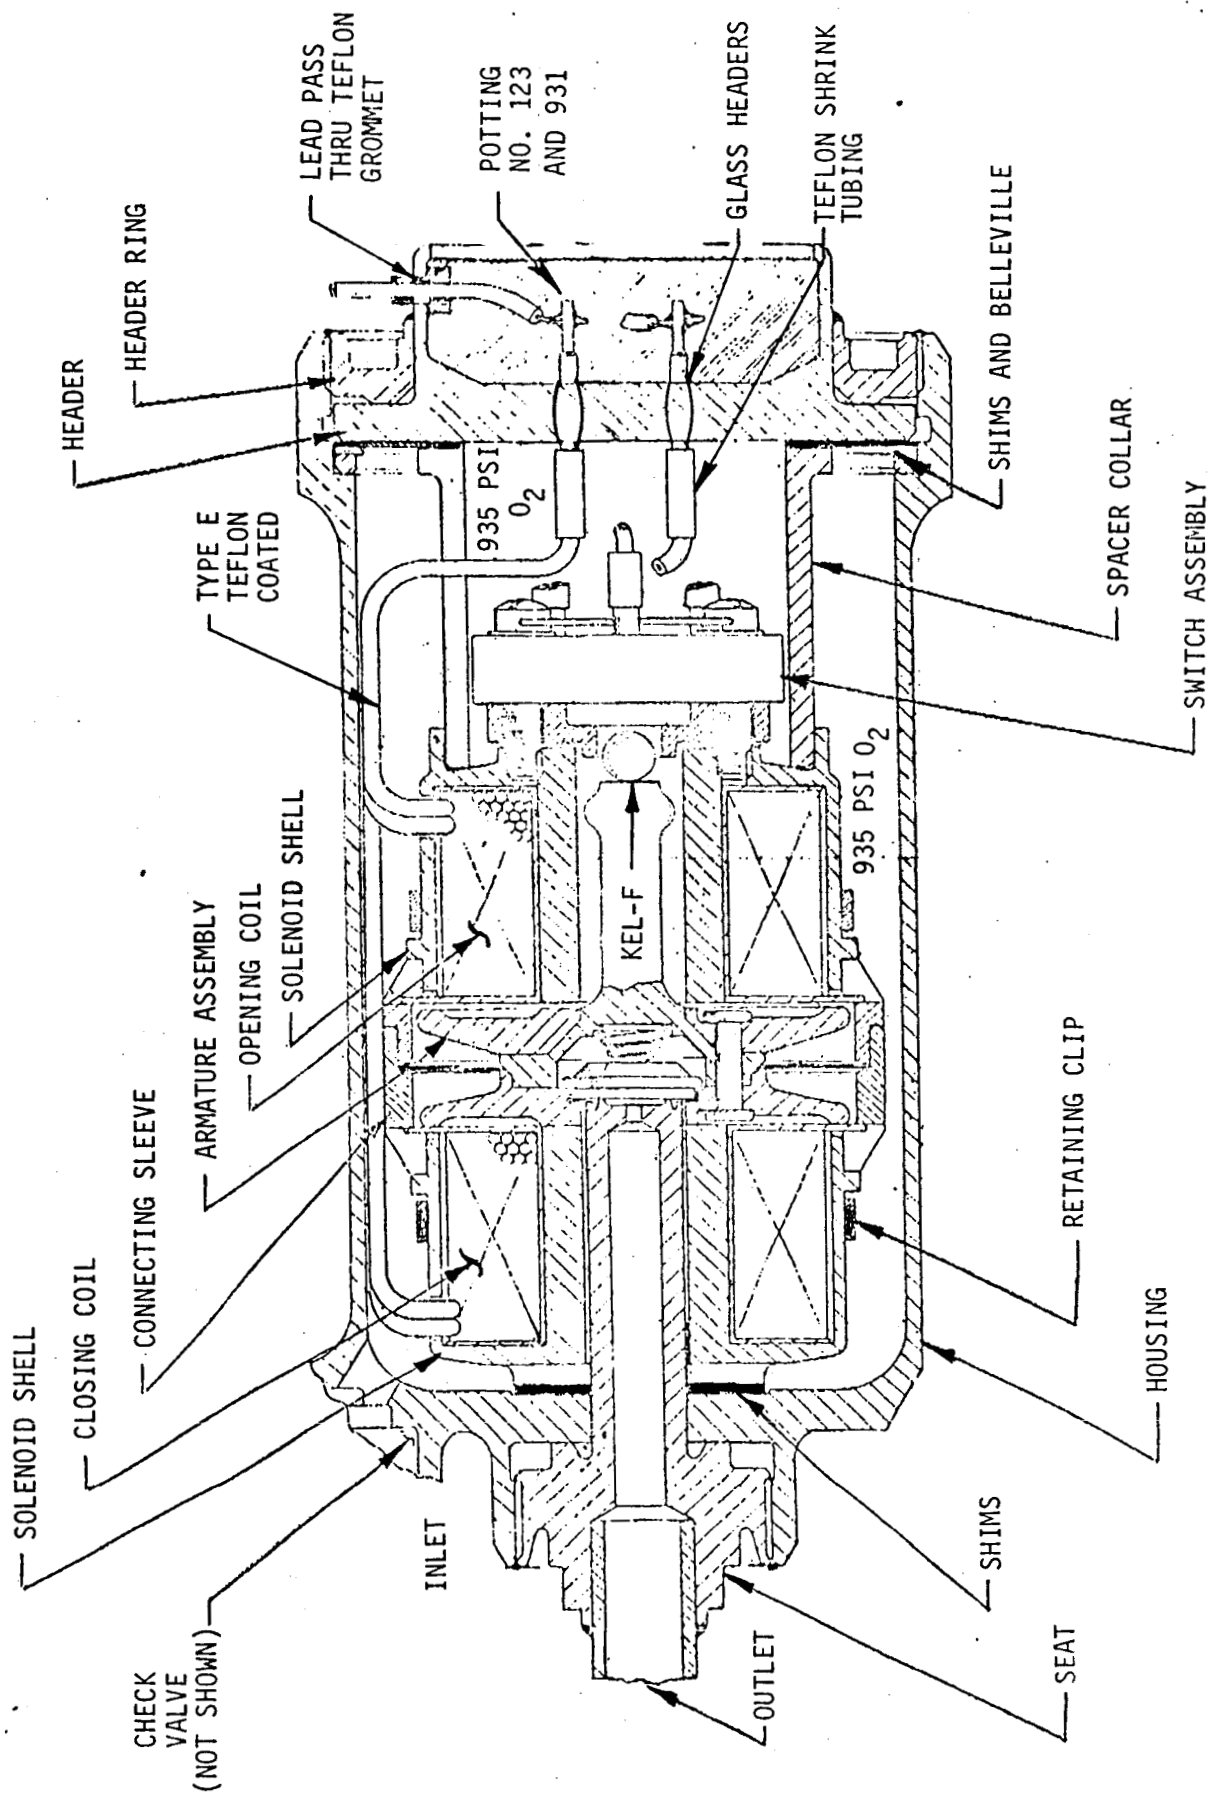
FUEL CELL VALVE MODULE SOLENOID VALVE.
